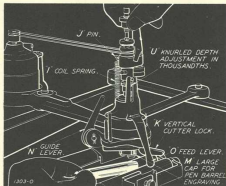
LIFTING CUTTER HEAD TO PLACE PEN BARREL ON ROLLERS
